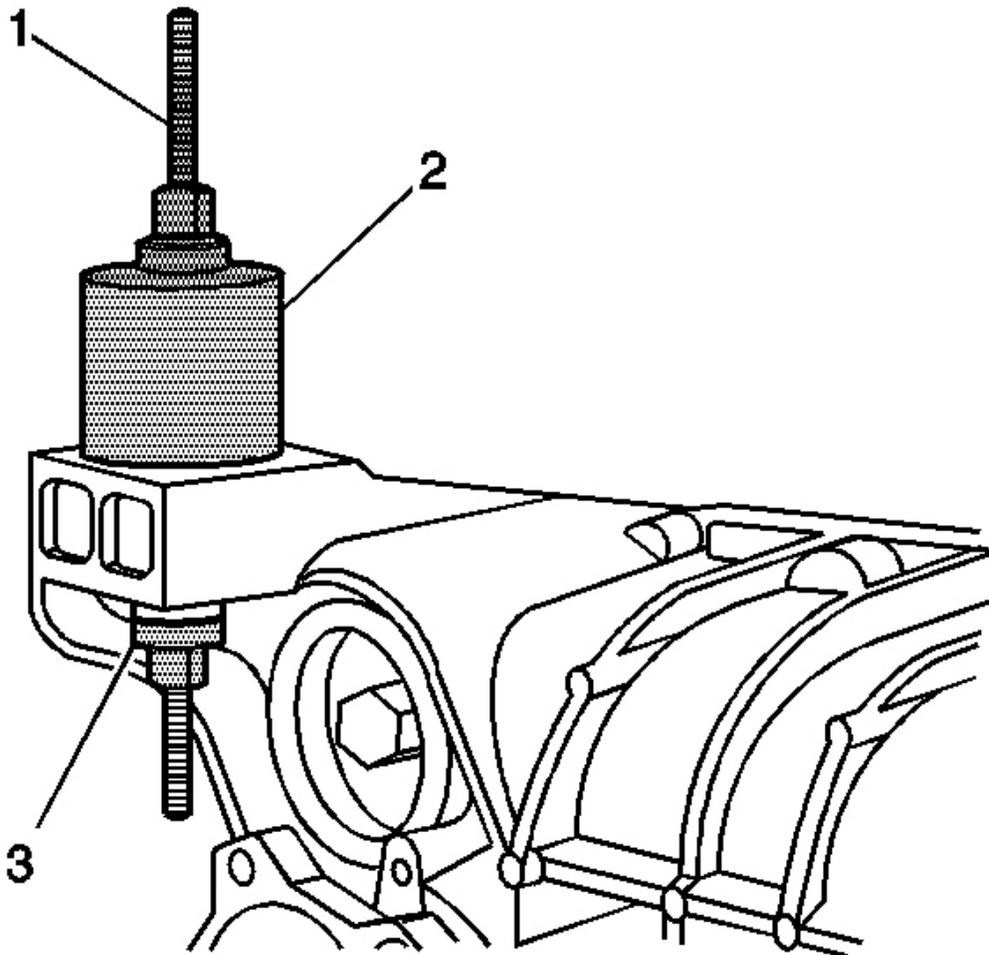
Installing J 45755-3, J 45755-4, Forcing Screw, Bearing & Washers Over Differential Carrier Assembly
